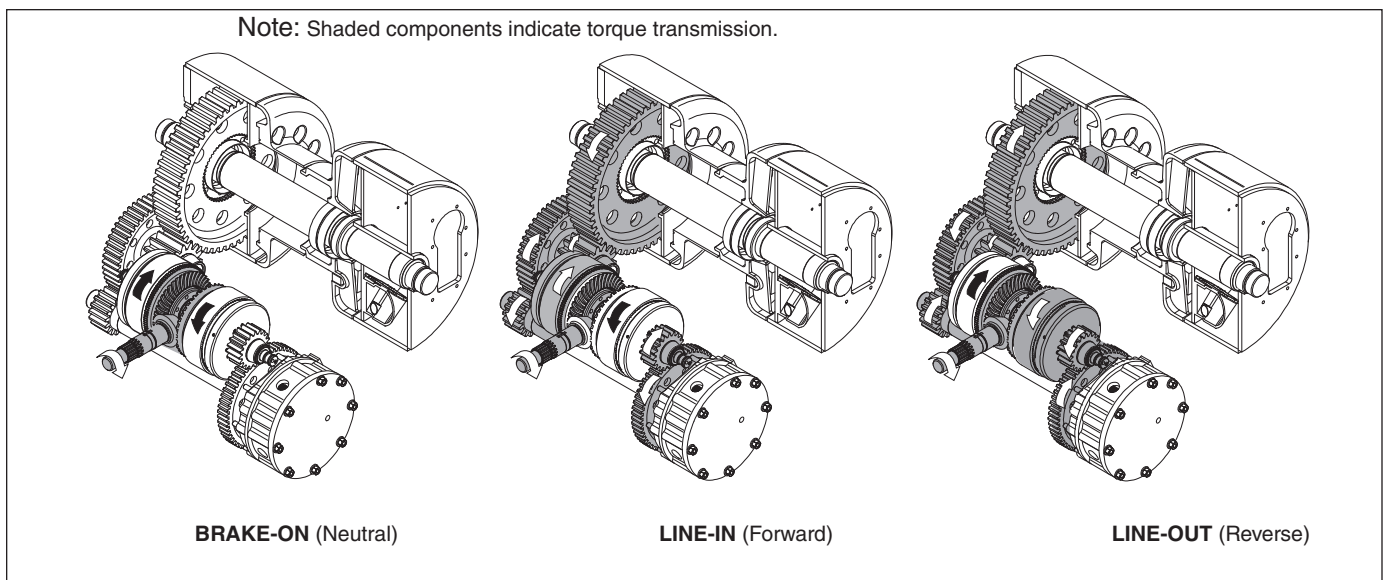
Gear Train Rotation Torque Transfer (Ratio #7)
